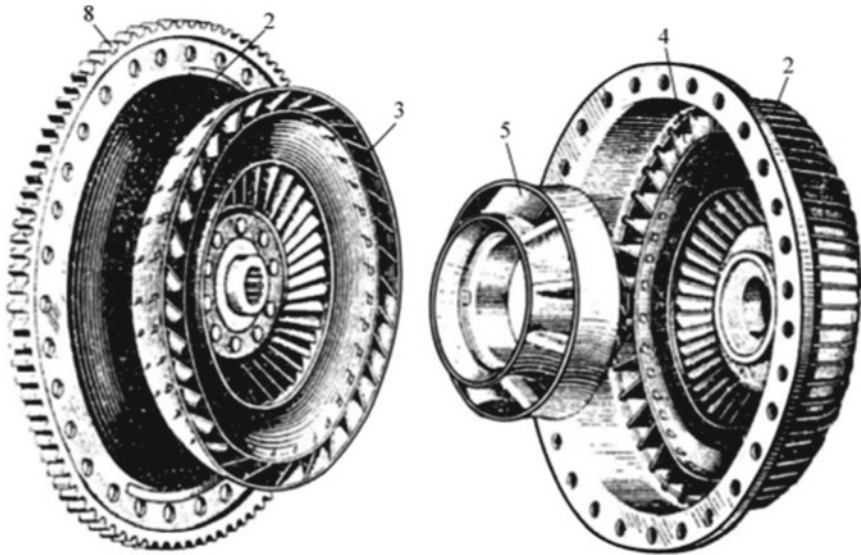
Main parts of hydraulic torque converter (with the legends the same as Fig. 10.1)
